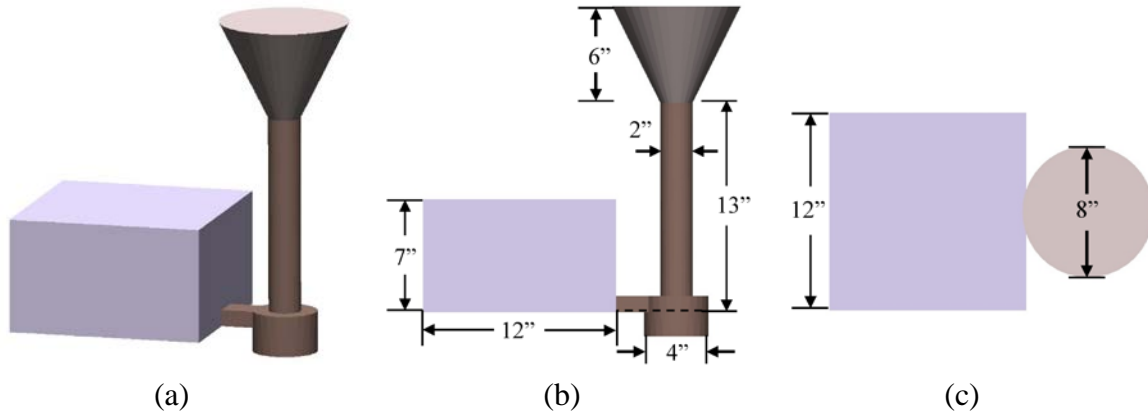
Gating system and casting geometry for the cone pouring cup with bottom ingate cases: (a) isometric view, (b) front view and (c) top view.
